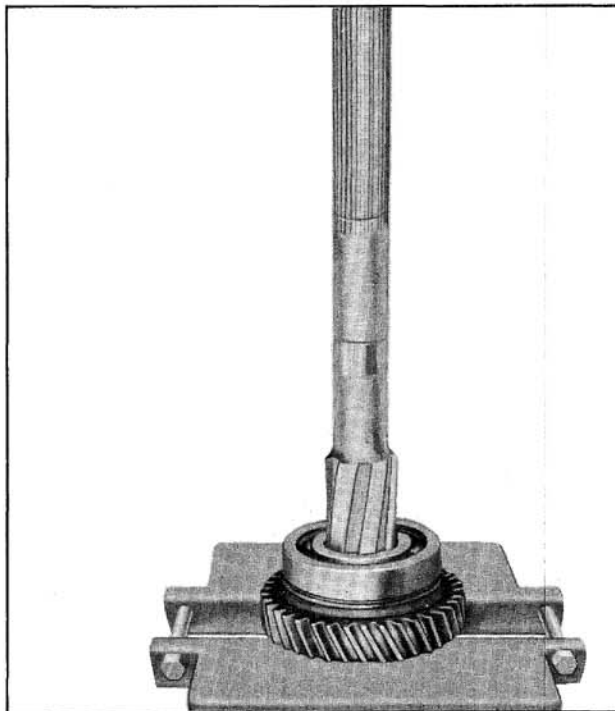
Removing Mainshaft from Rear Bearing and First Speed Gear
